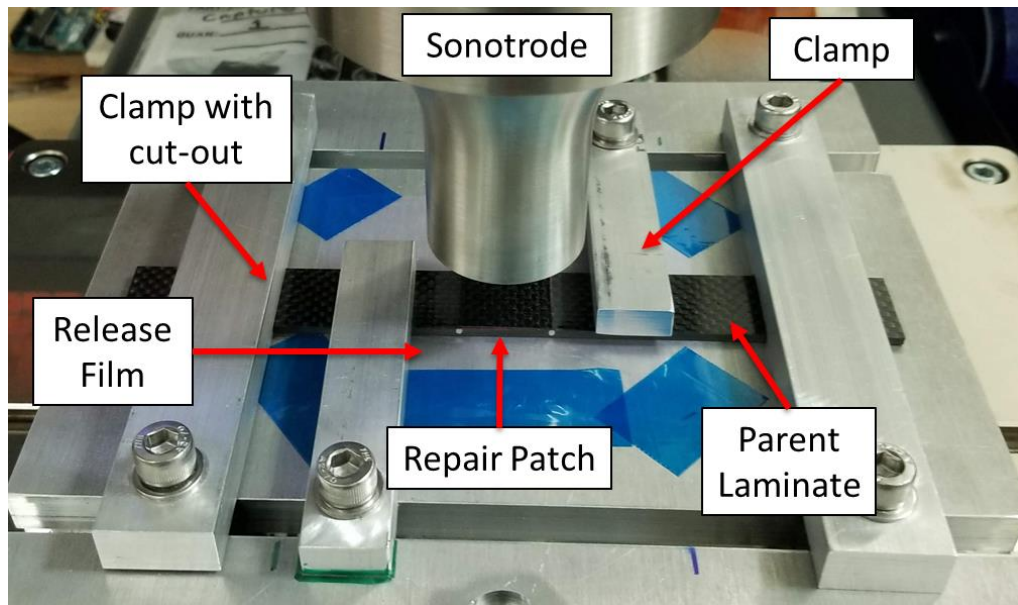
Ultrasonic welding fixture used for repair of open-hole samples. Release film was placed below repair region and over the repair patch (not shown) to protect the fixture and sonotrode from flowing resin.
